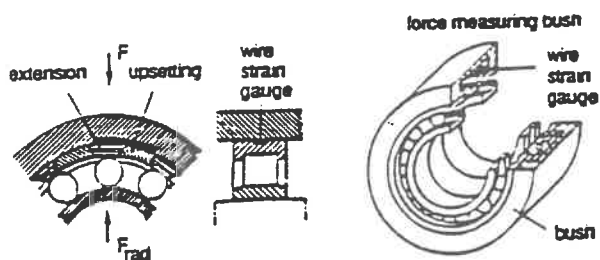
dynamometer built into spindle bearings and force measuring bushing
